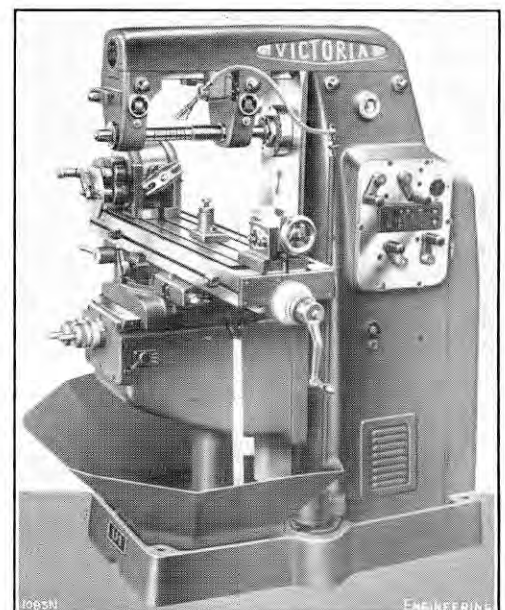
UNIVERSAL MILLING MACHINE; B ELLIOTT & CO., LTD.
